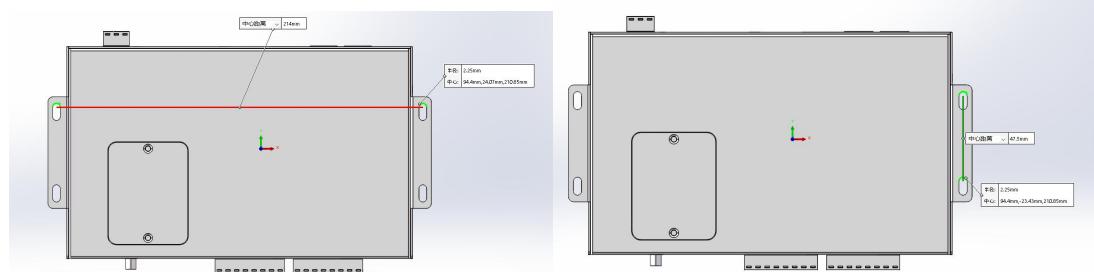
Opening Dimensions of SNE9610 Wall Mounting
